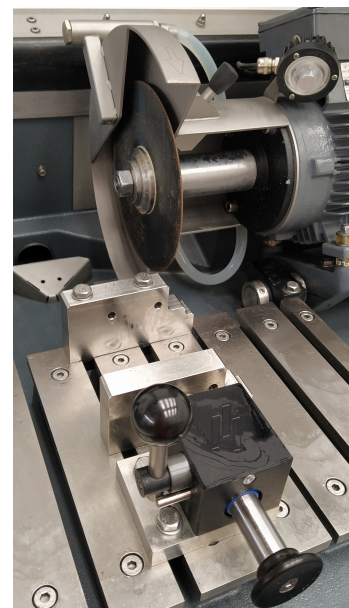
Struers Labotom-5* cutting machine and detail from the disk and sample holder.
